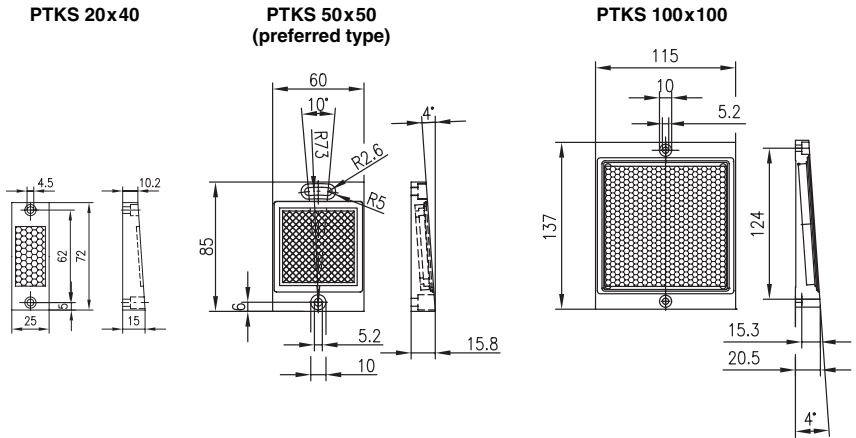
Dimensioned drawings for PTKS... reflectors
